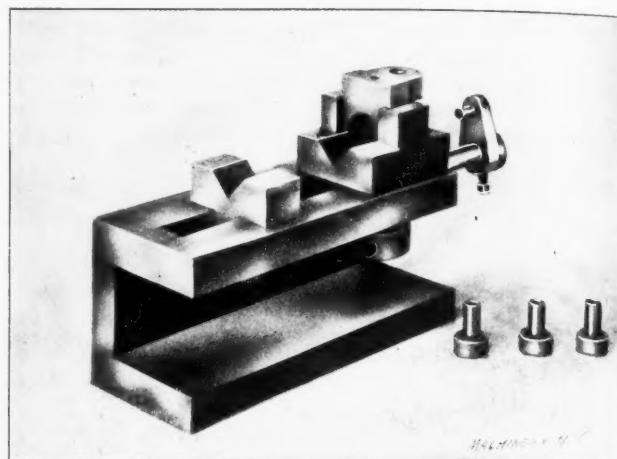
Jig for Holding Round Bar Stock while drilling Cross-hole.
